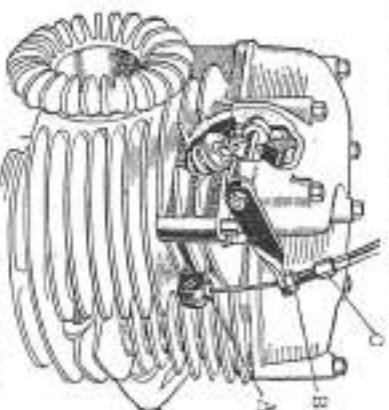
EXHAUST VALVE LIFTER ON "HORN CAMSHAFT" ENGINES
